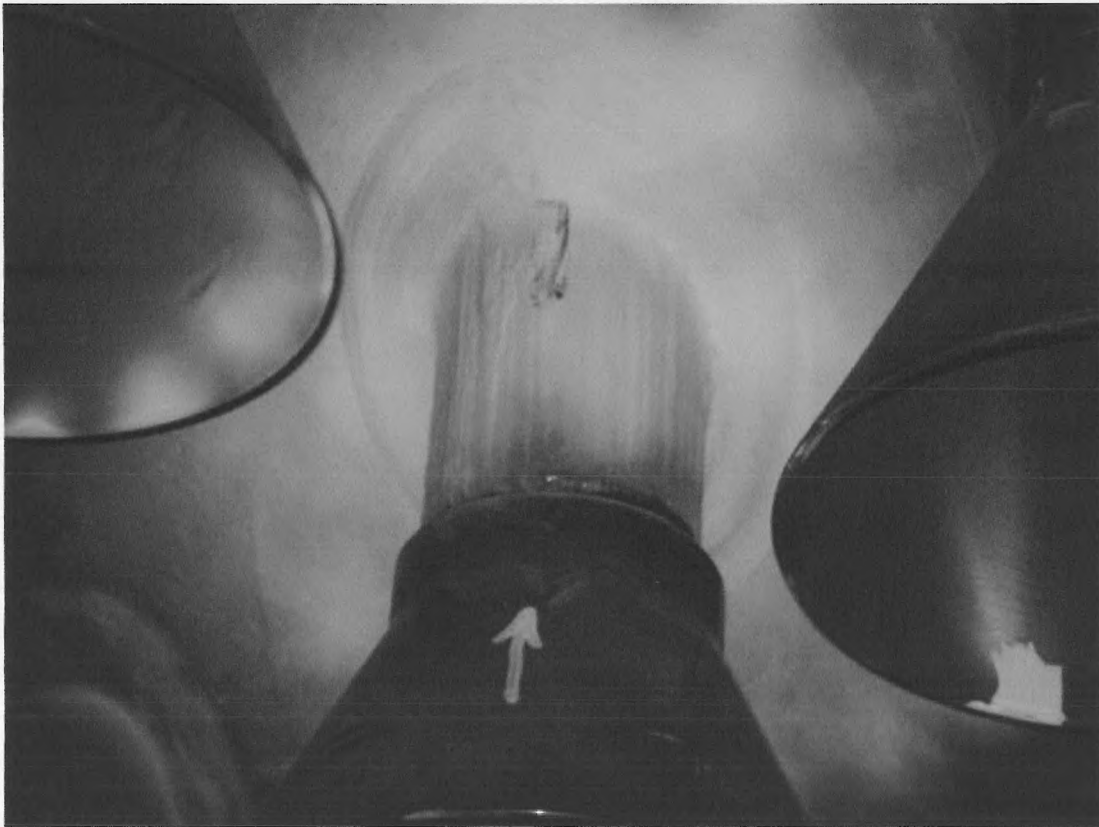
Example of an indication at the boundary of the vertical weld passes on the penetration tube, and the elliptical weld passes on the head
